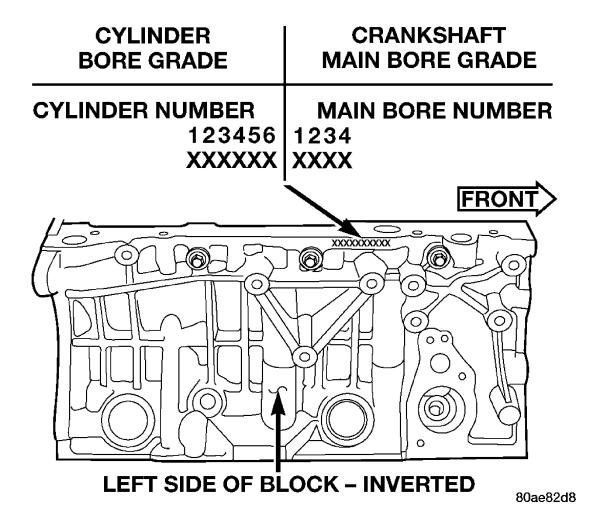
Identifying Cylinder Block Main Bore Grade Marking Courtesy of CHRYSLER LLC
